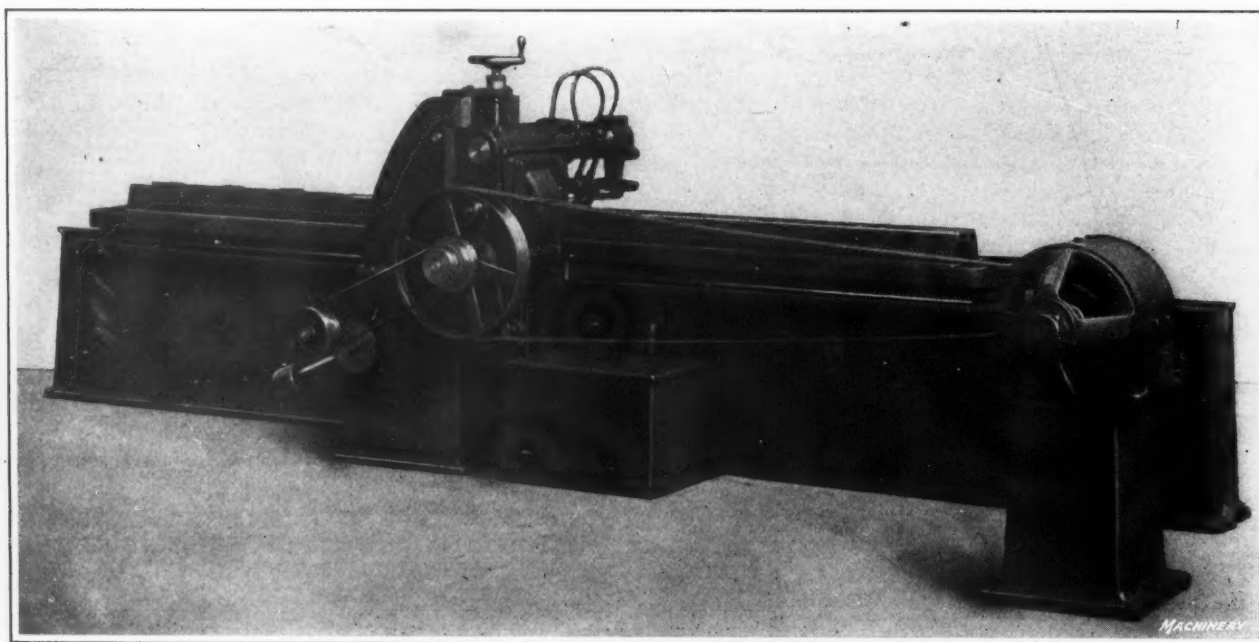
Rear View of Special Keyseating Machine shown in Fig. 2
